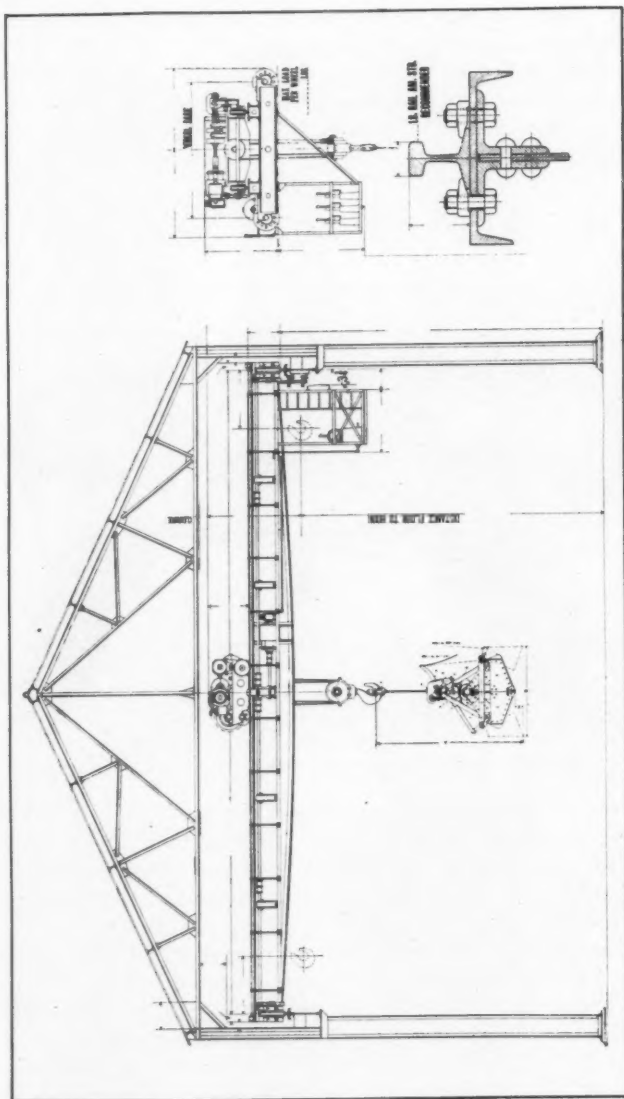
CLEARANCE DIMENSIONS OF BUCKET ON CRANE
